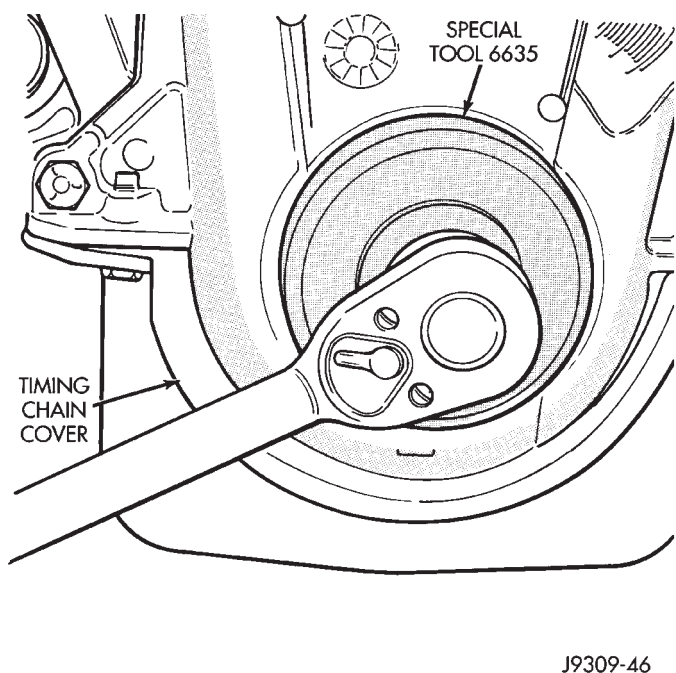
Placing Oil Seal on Installation Tool 6635
